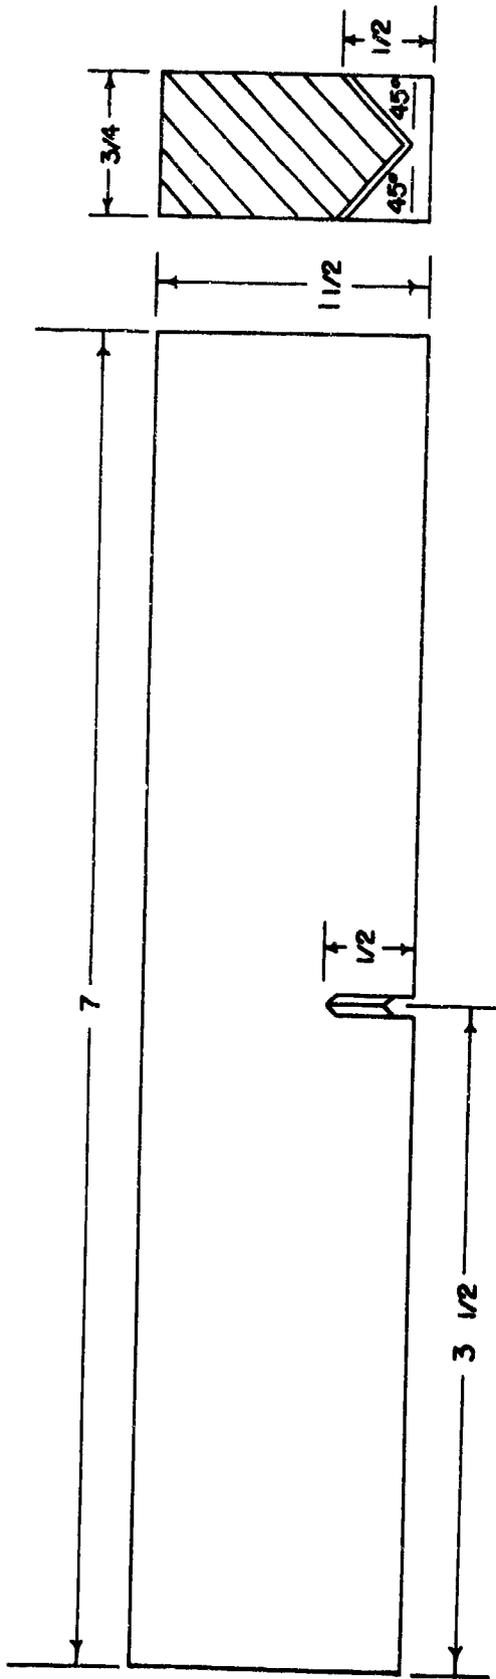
FRACTURE TOUGHNESS SPECIMEN
